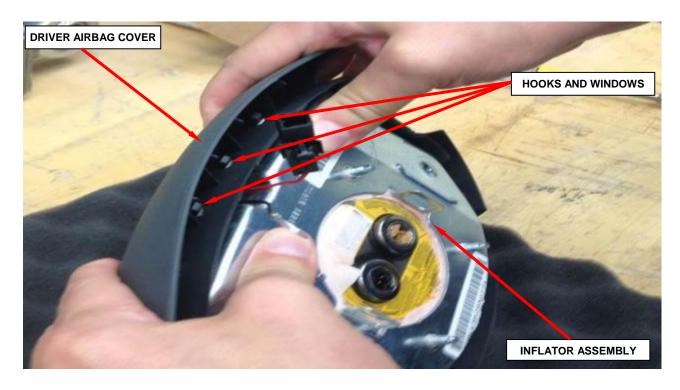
Top Driver Airbag Cover to Inflator Assembly Hooks
